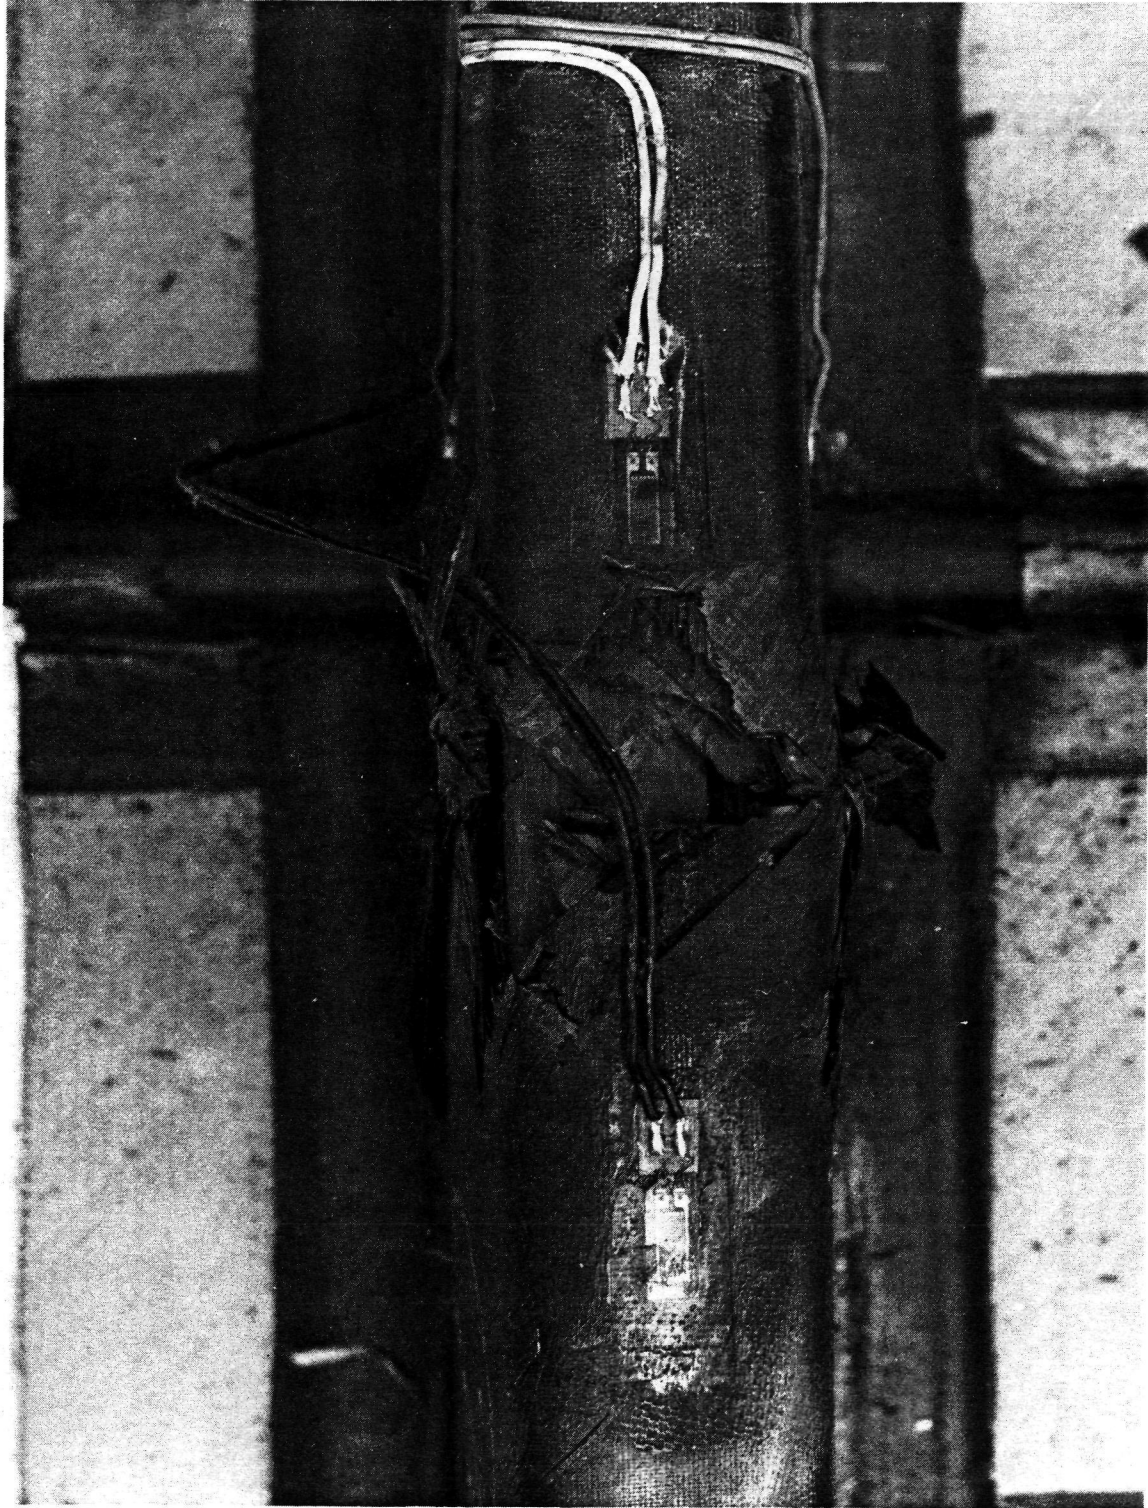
TEST #3, FRAME S/N 3; TOP VIEW OF FATIGUE FAILURE SHOWING FRACTURE OF SHEAR WEB AND UPPER CAP.
